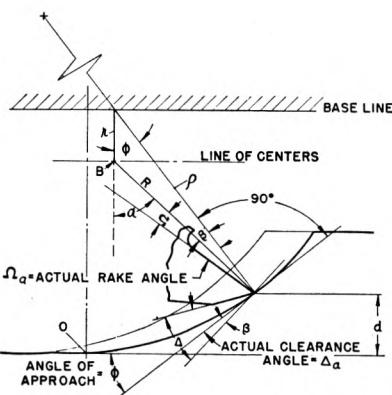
CLEARANCE AND RAKE ANGLES ALONG PATH OF MILLING-CUTTER TOOTH
